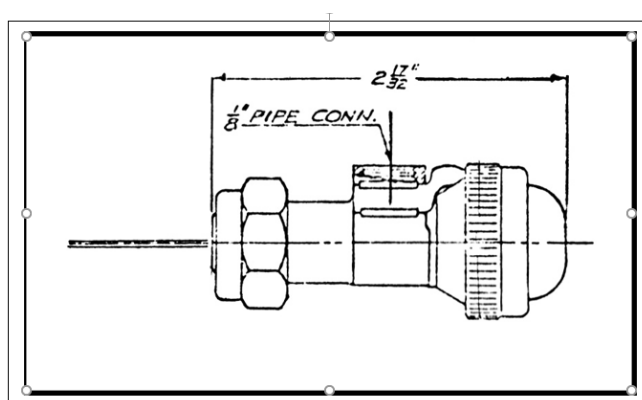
Solid stream #4664 TeeJet nozzle (Spraying Systems Co., Drawing. No. 5551).
